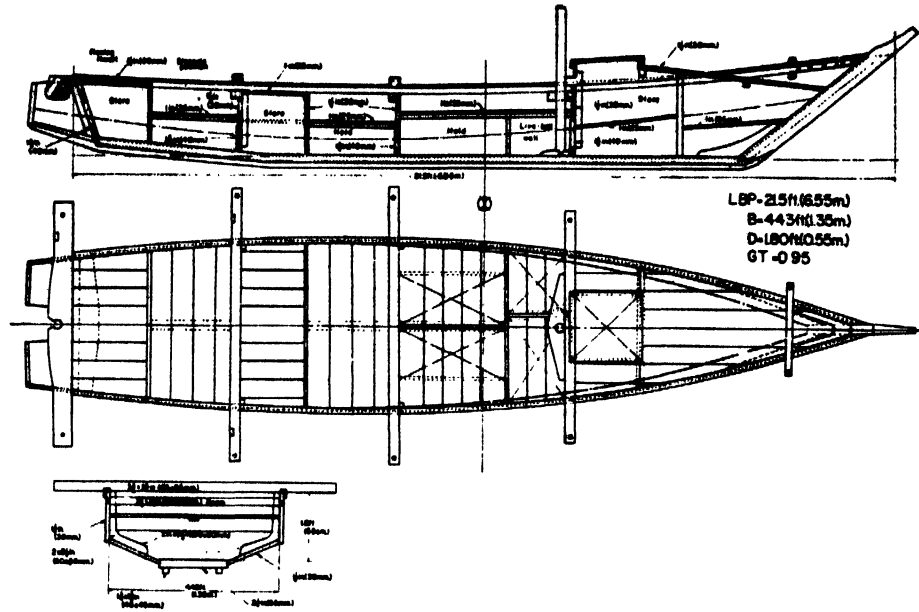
Construction plan of Yamato type, built of wide wooden planks, without a complete frame system
